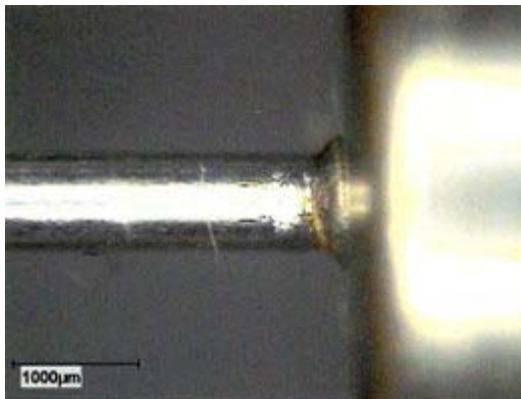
Lead Wire $\varnothing 0.8\text{mm}$, CCS 40, Welding ok, 9 Bending Cycles
